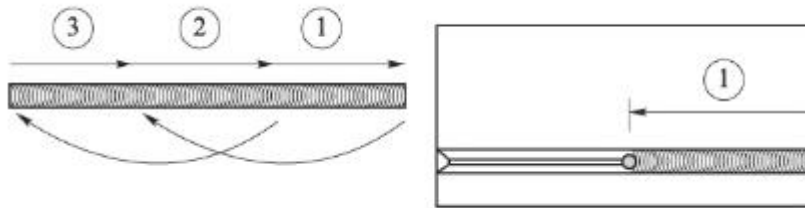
c Welding sequence for cracks with length less than 300 mm
